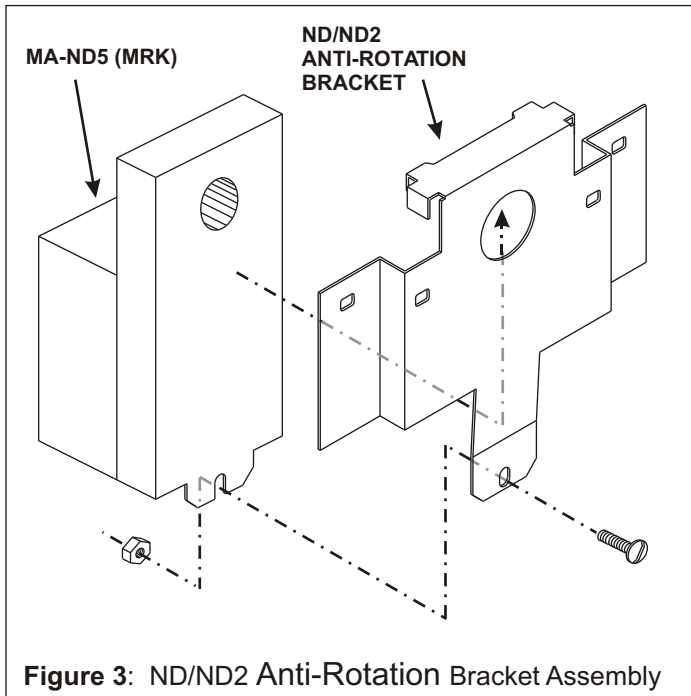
ND/ND2 Anti-Rotation Bracket Assembly
